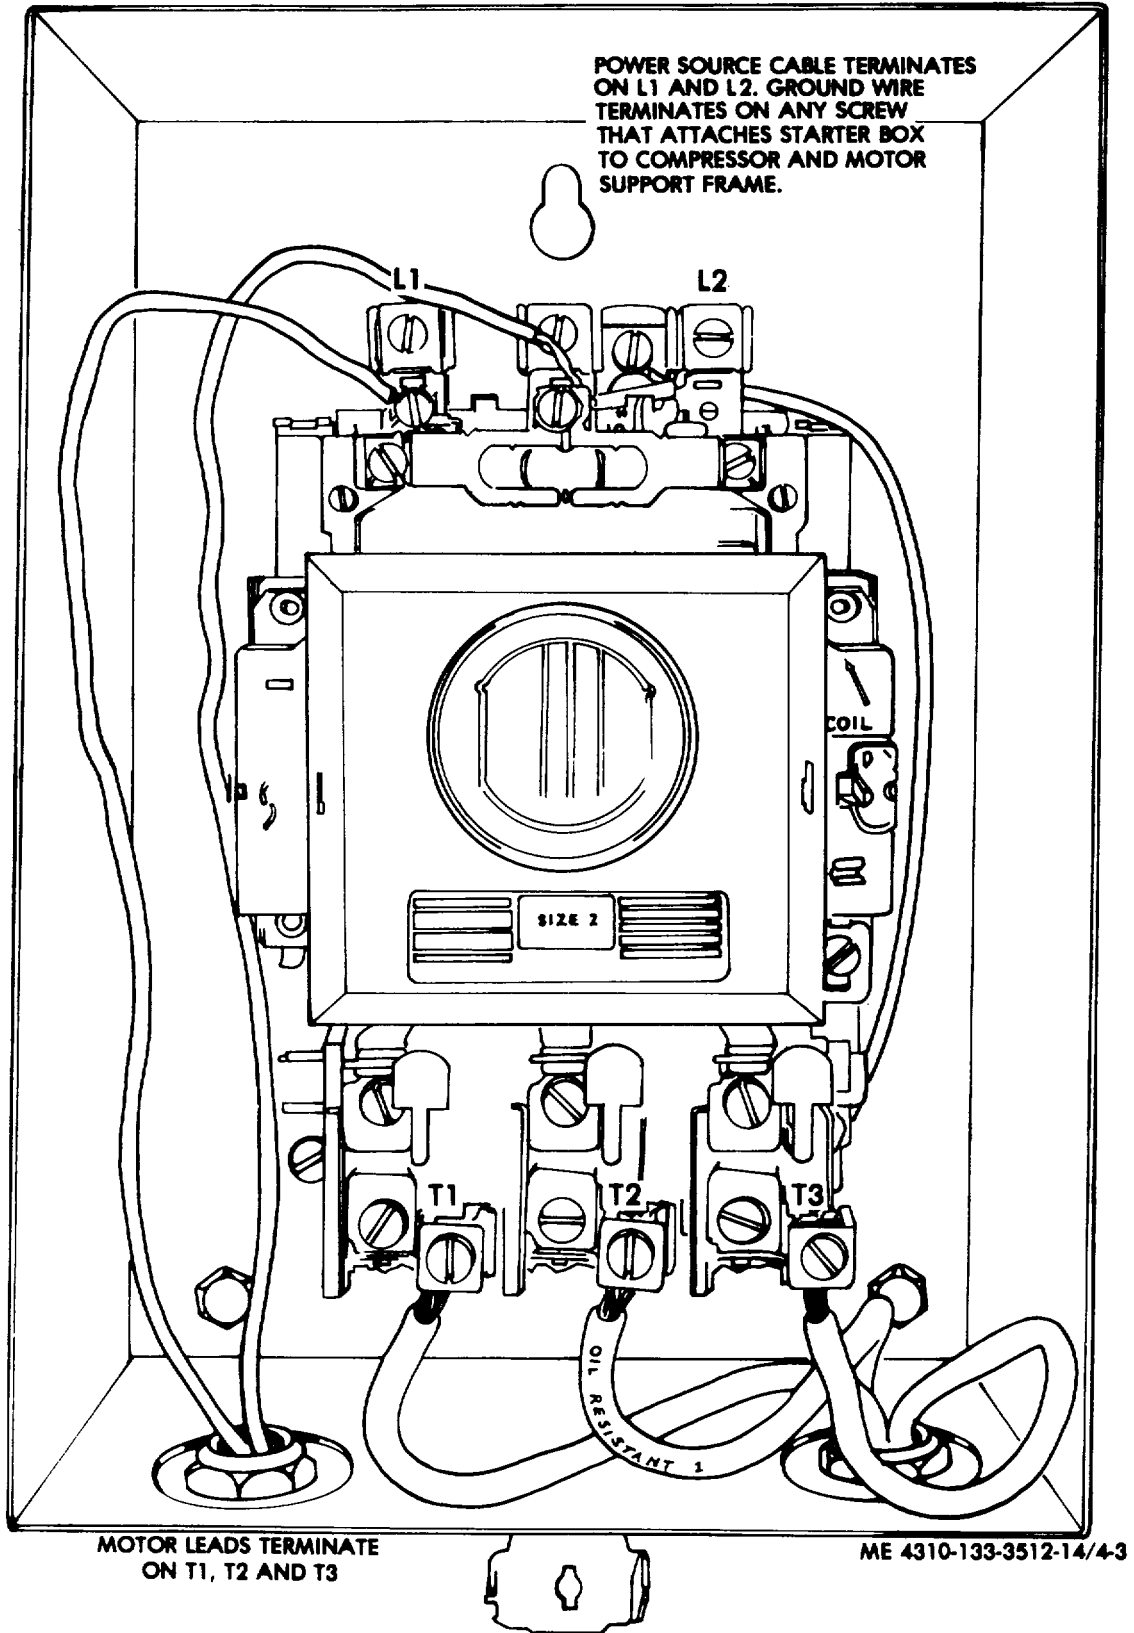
Magnetic Starter (Shown with Cover Removed), Model HR10-8M-1 or HR10-8M-4
